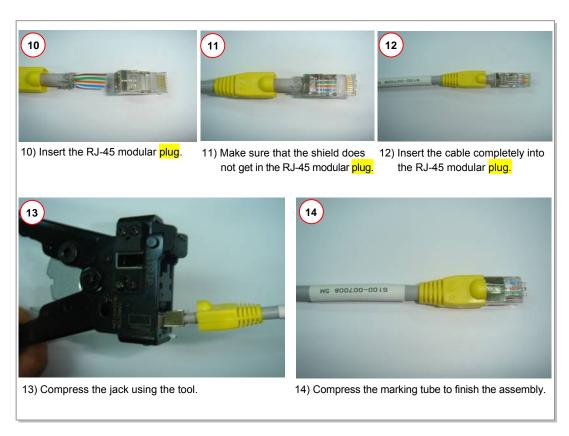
Assembling the RJ-45 Connector (Shield Type) (2)
